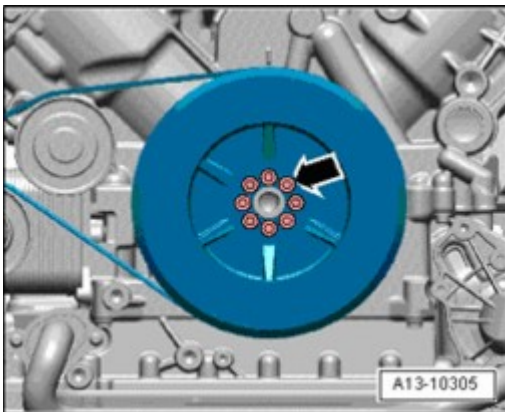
Loosening Mounting Bolts On Vibration Damper
